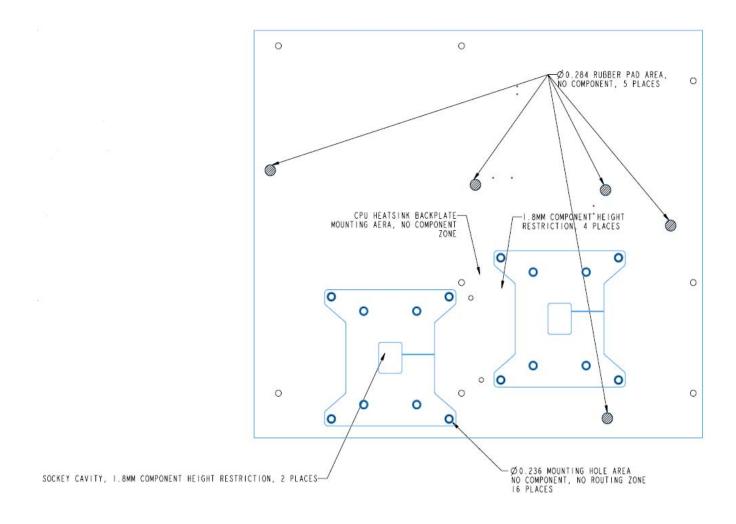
Secondary Side Keepout - CPU Socket and Rubber Pad Keepout
